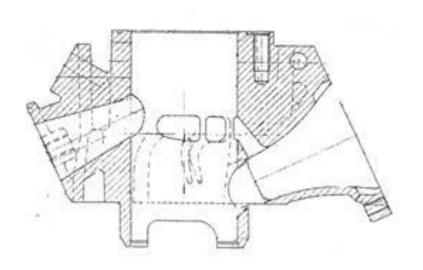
# PHOTO OF THE COMBUSTION CHAMBER IN THE CYLINDER HEAD
